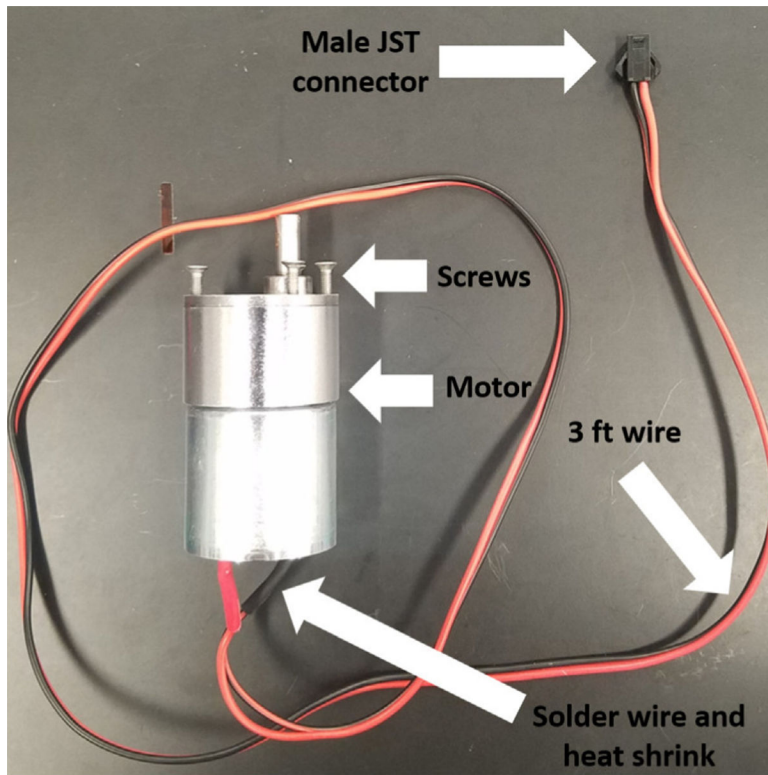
Motor preparation. Photo of assembled motor for connecting to the acrylic plate.
